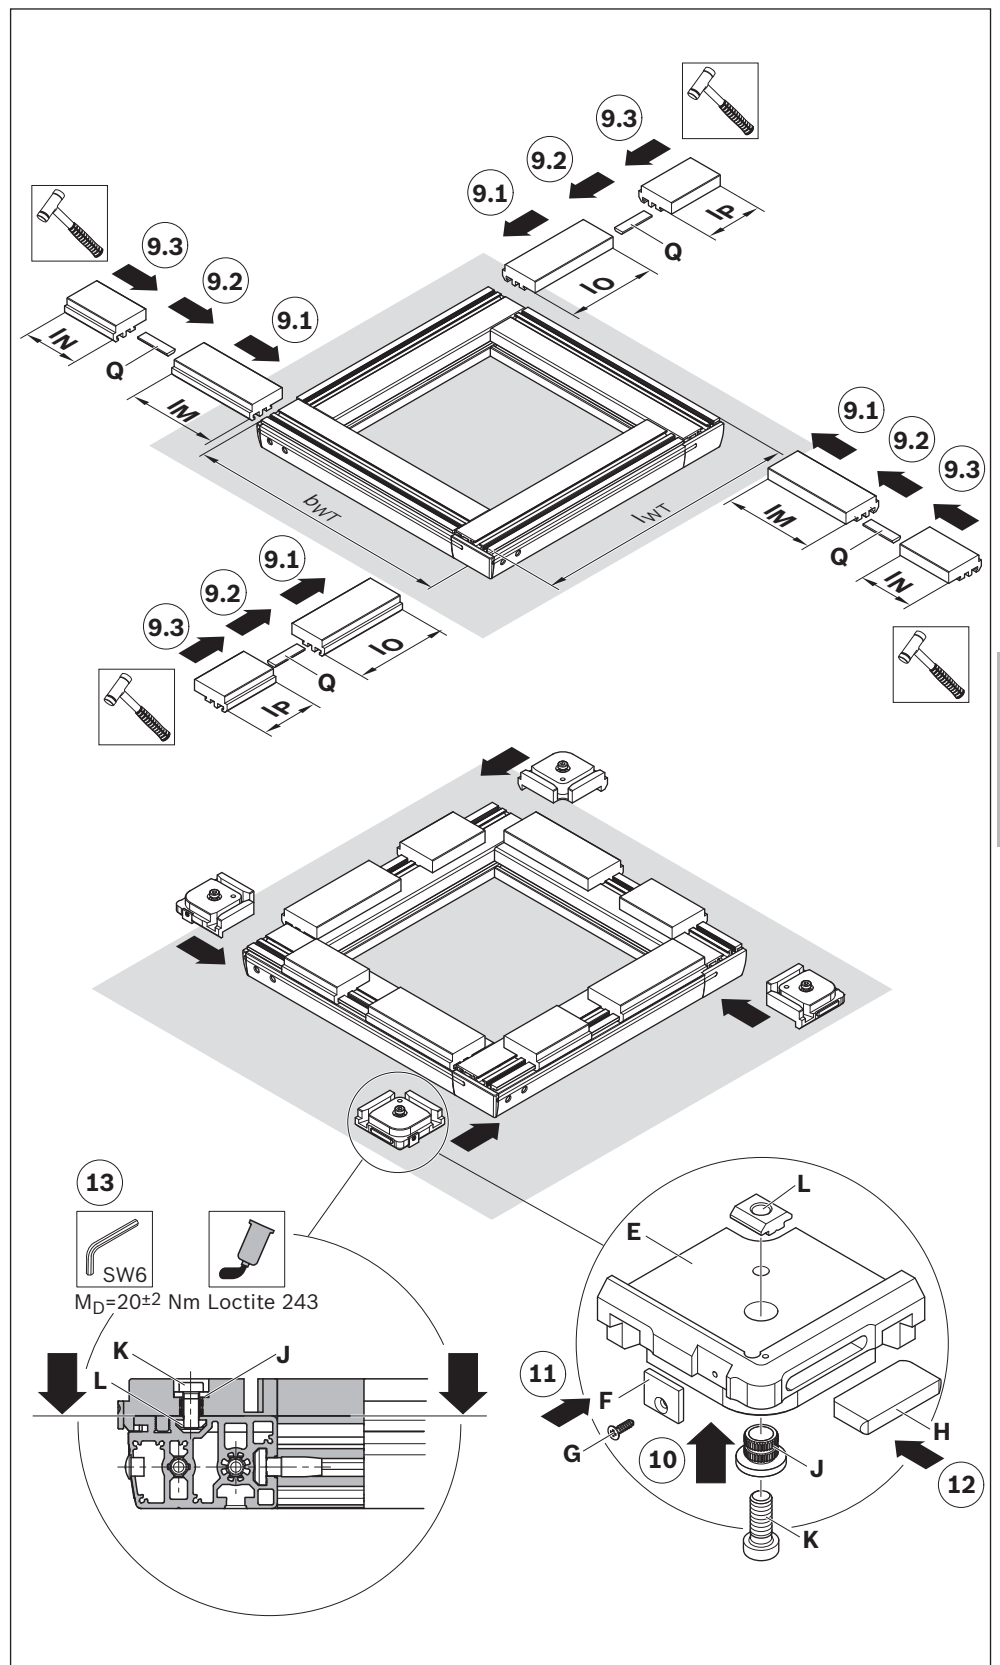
Assemble workpiece pallet WT 2/F-H (2/2)
